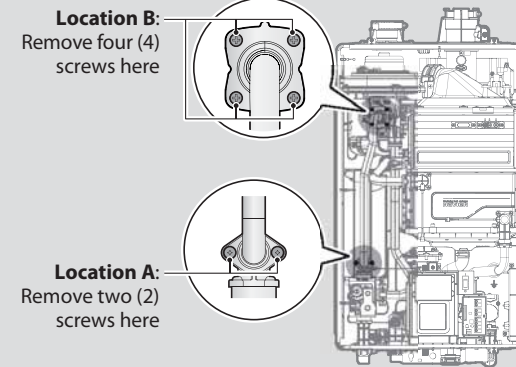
Detaching Gas Valve from Gas Inlet Pipe and Fan Motor Assembly
